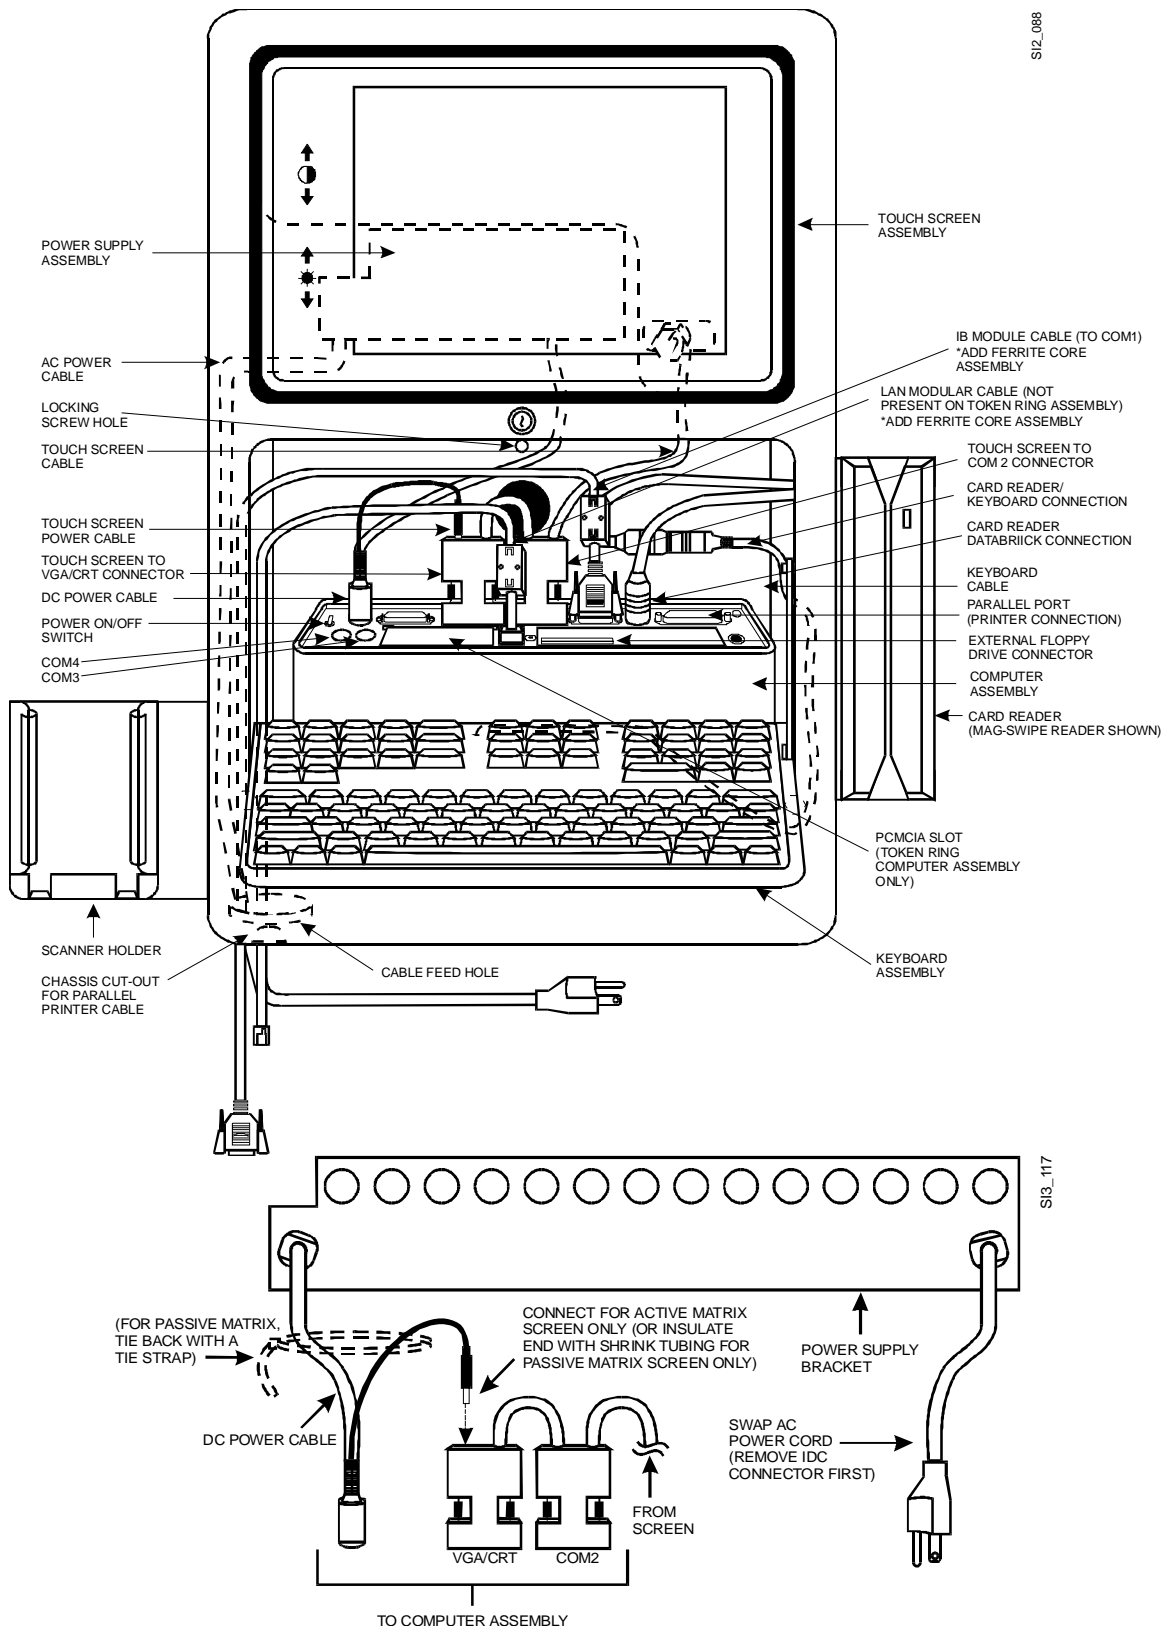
Earlier Version DT System Internal Cable Layout And Assembly Identification
